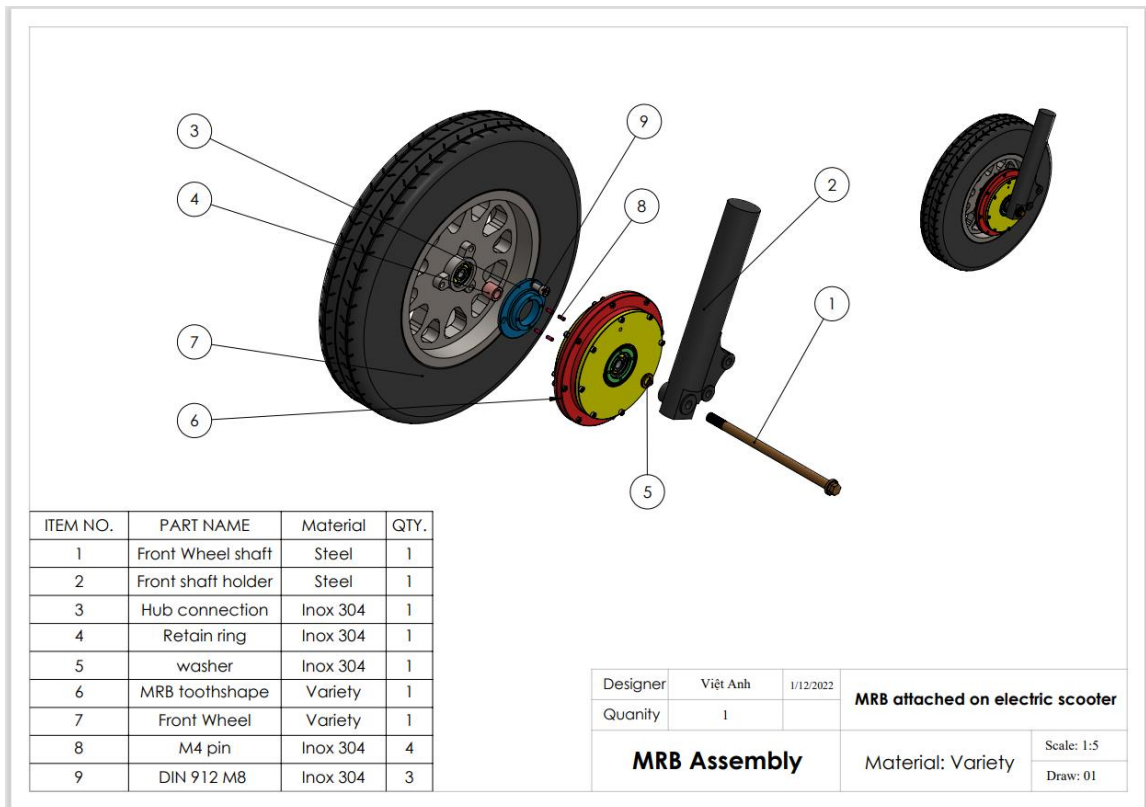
2D drawing of assembly of MRB and electric scooter
